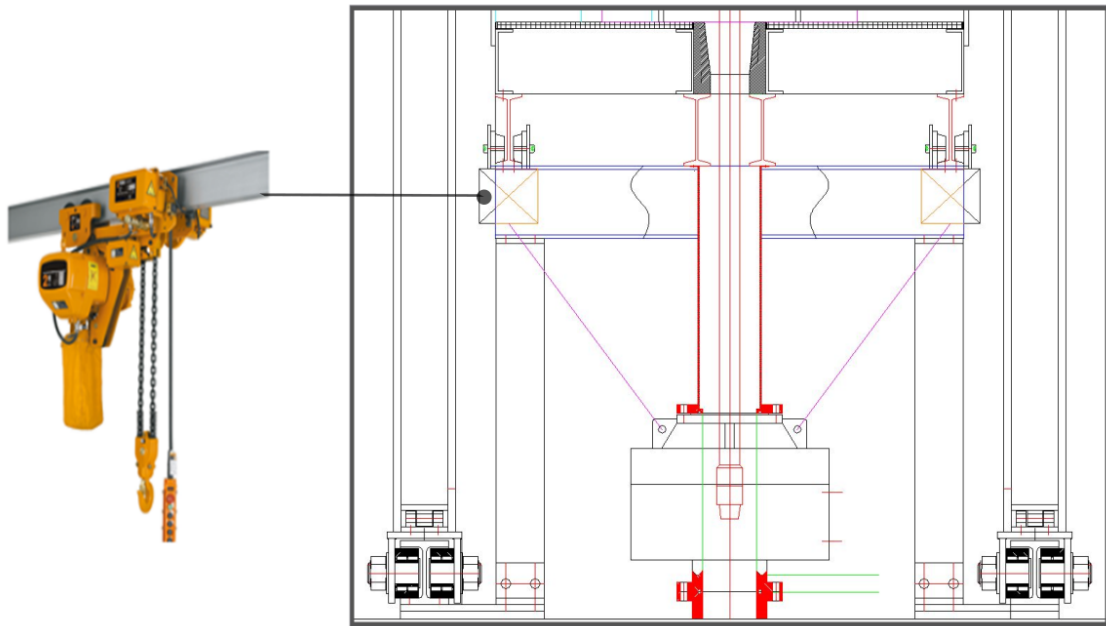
The cutaway front view of the partially visible substructure supporting the master bushing and the trolley system [48].
